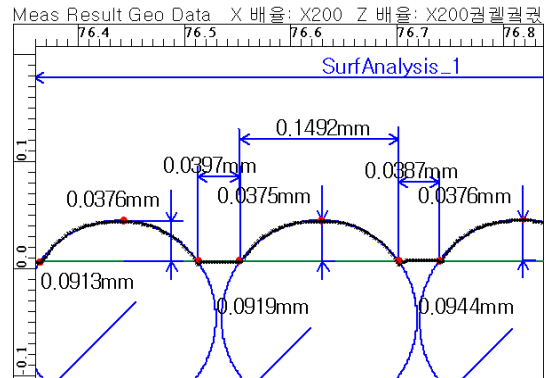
Profile of formed lenticular by press forming with machined pattern
